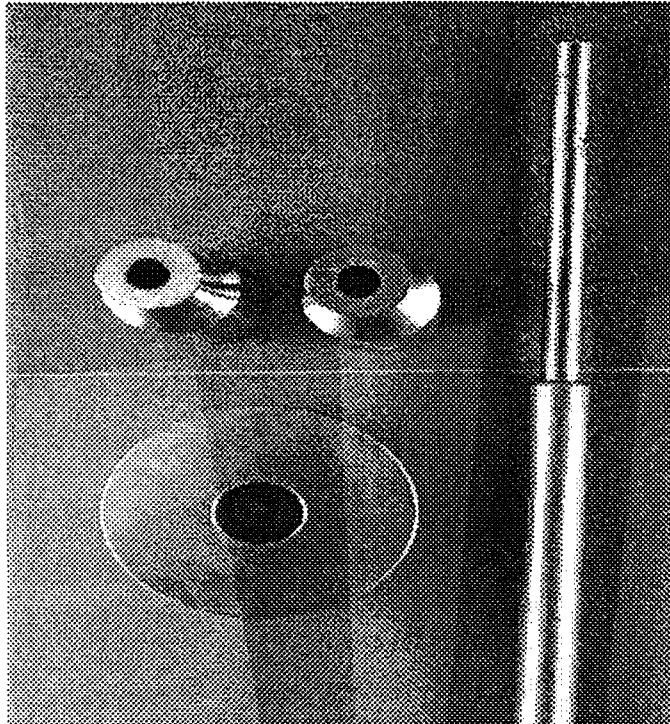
a Tabletting tools to compress doughnut-shaped tablet consisting of punches, die cavity and inner rod
